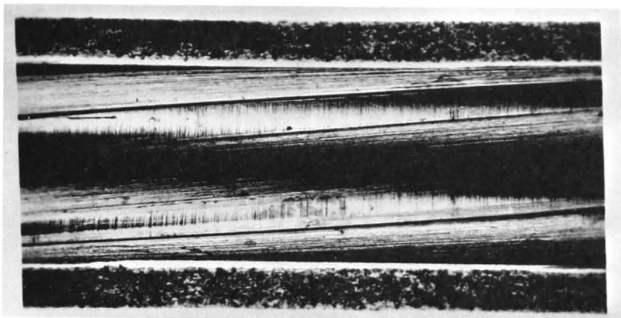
Section of barrel rifled with a "hook" cutter. Longitudinal marks due to rifling tool. Transverse marks due to drill.
